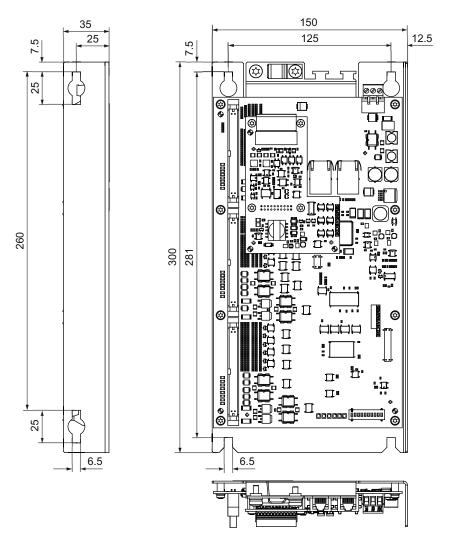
PP 72/48D 2/2A PN dimension drawing
